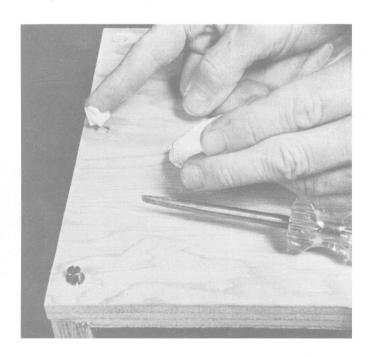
Fill all holes before the final smoothing and just prior to the first finish coat.
